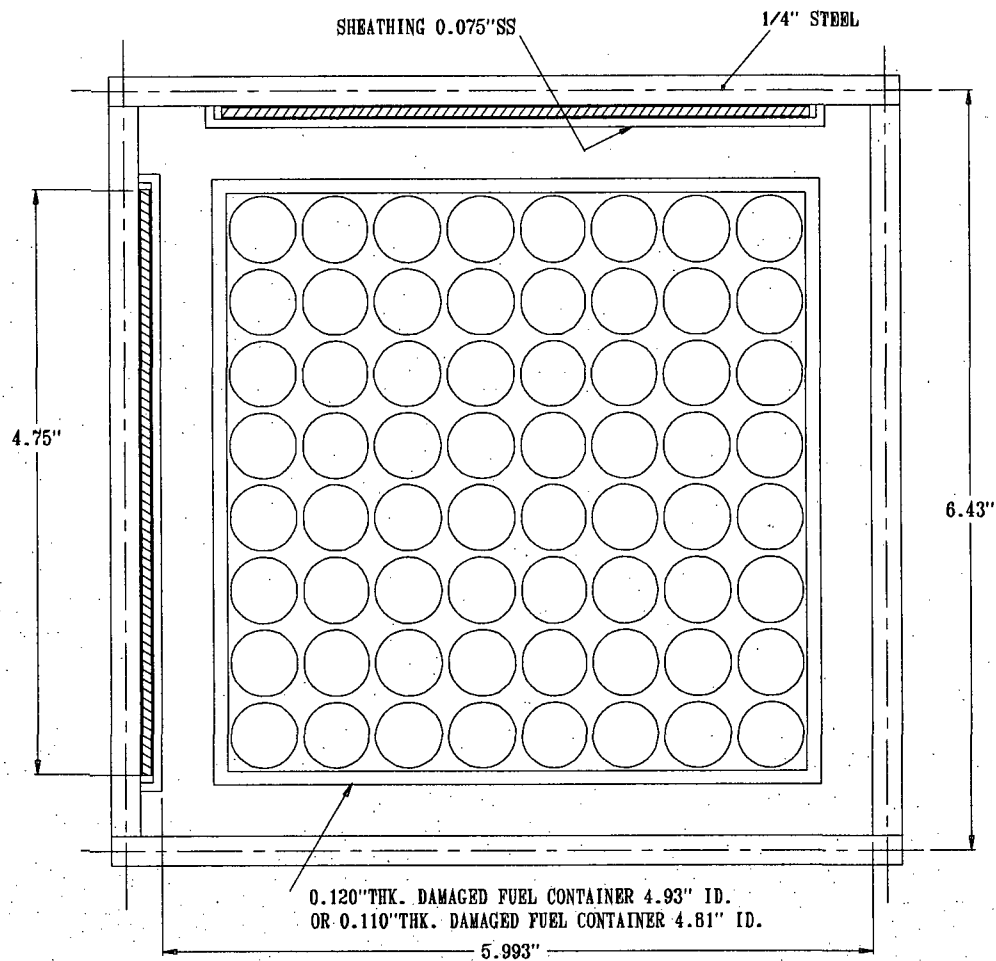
; FAILED FUEL CALCULATION MODEL (PLANAR CROSS-SECTION) WITH DAMAGED FUEL COLLAPSED INTO 8X8 ARRAY IN THE MPC-68 BASKET (SEE CHAPTER 1 FOR TRUE BASKET DIMENSIONS)
